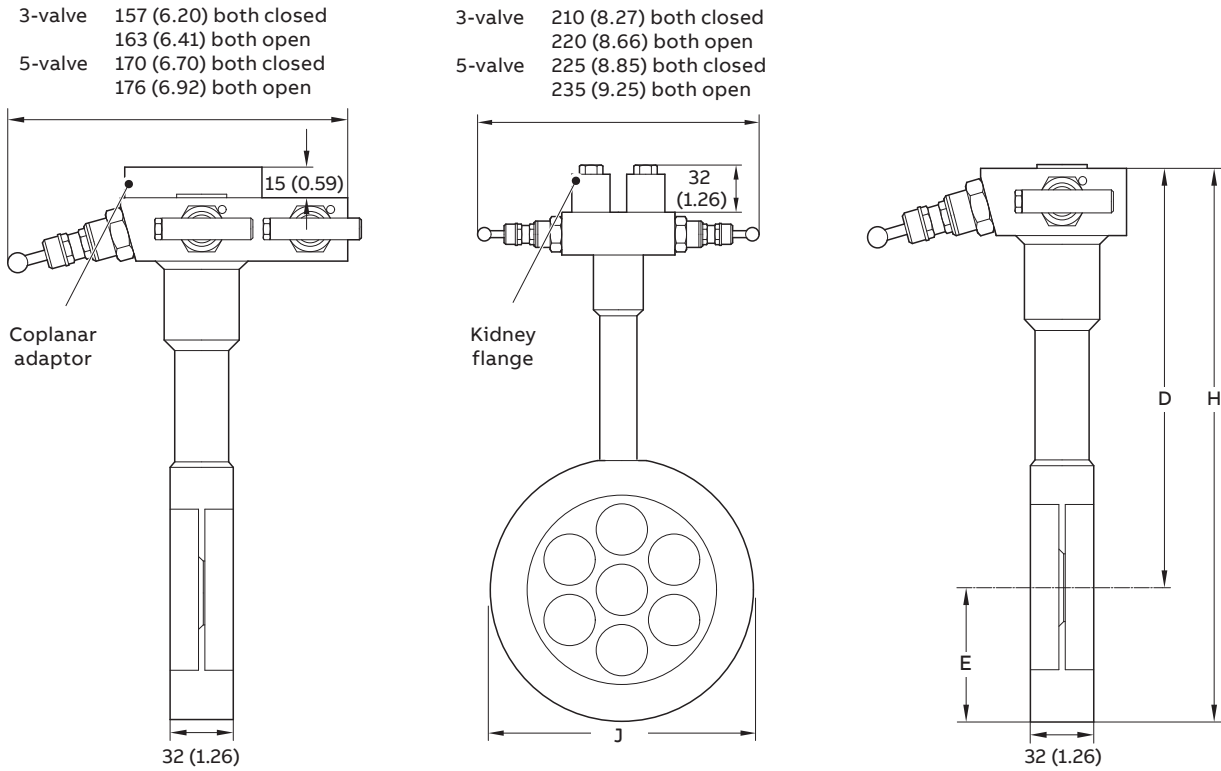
FPD175 3-valve (with remote mount adaptor) and 5-valve dimensions
